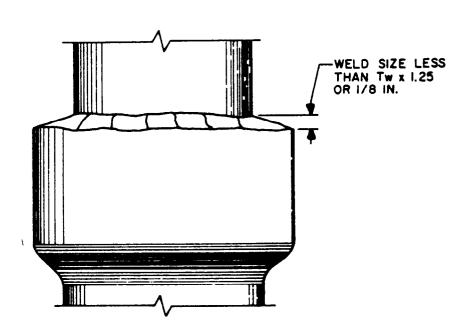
Unacceptable Socket Weld Fillet Sizes for Components Other Than Flanges.
